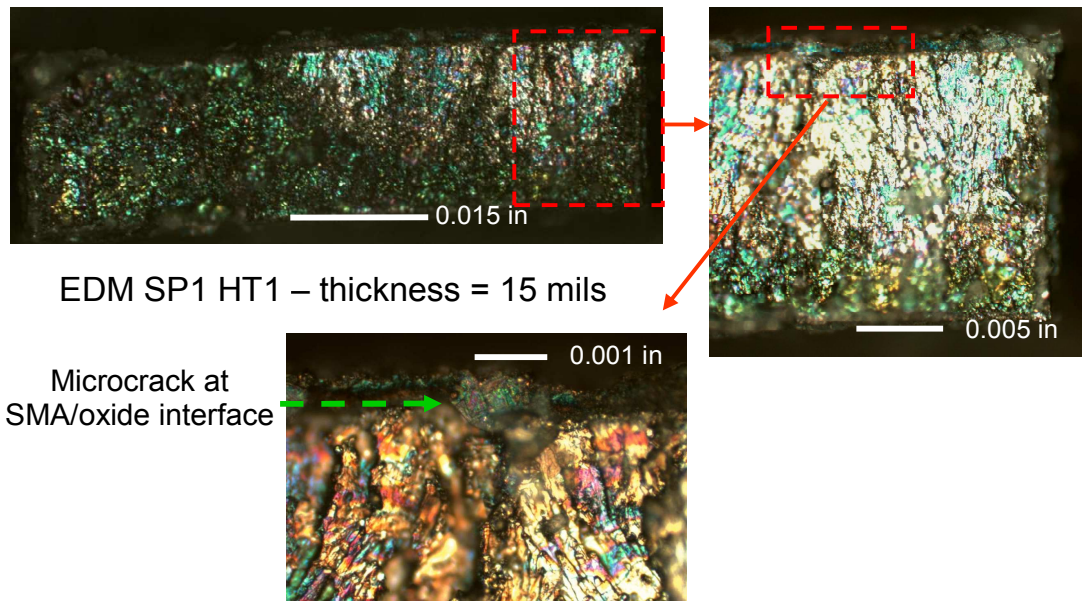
Optical fractography for fatigue test specimen EDM SP1 HT#1.
